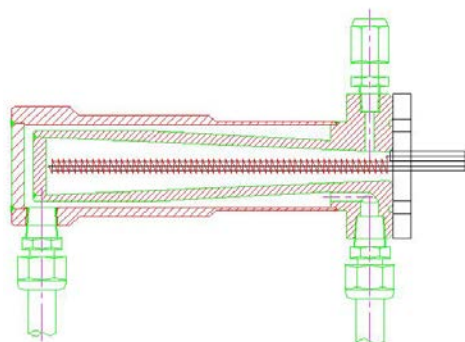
Cross-section of typical gas target with heating jig inserted. Jig mounts where entrance foil is normally mounted. Inner volume is target gas pressure vessel, outer volume is water cooling jacket.
